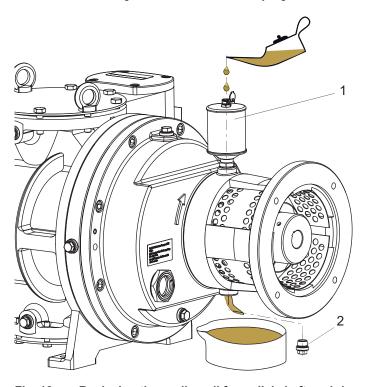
Replacing the sealing oil for radial shaft seal rings
